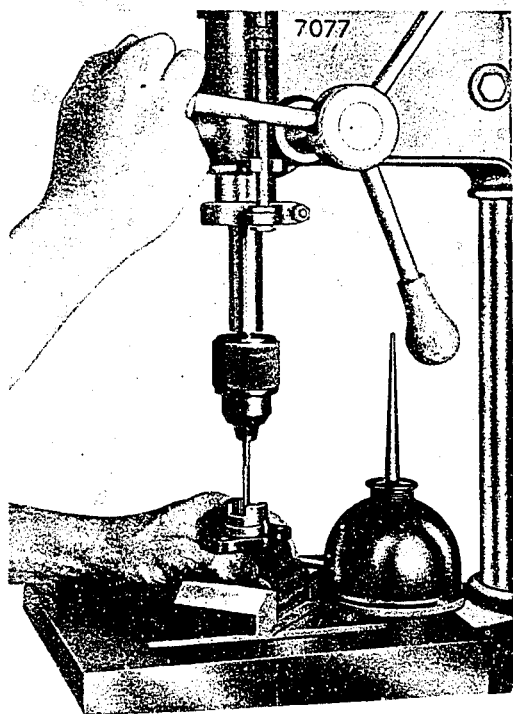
DRILLING OR REAMING SPINDLE BORE
